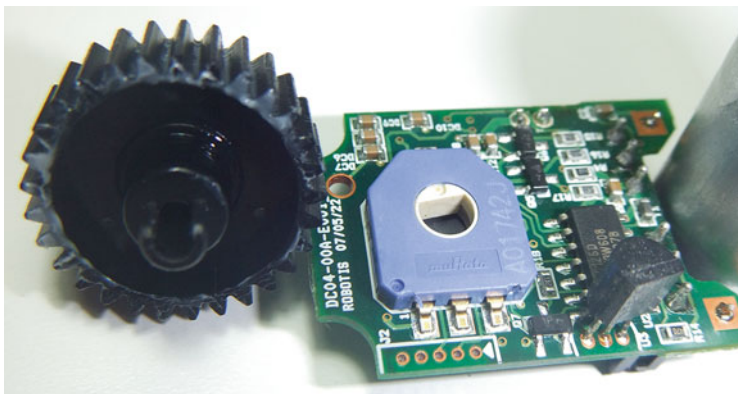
AX-12 PCB with Murata SV01A103 (*light gray hexagonal box*) and main gear shaft
